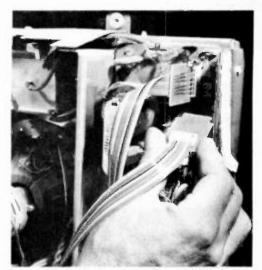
Module connectors are inserted in the chassis circuit board connectors by a technician.
